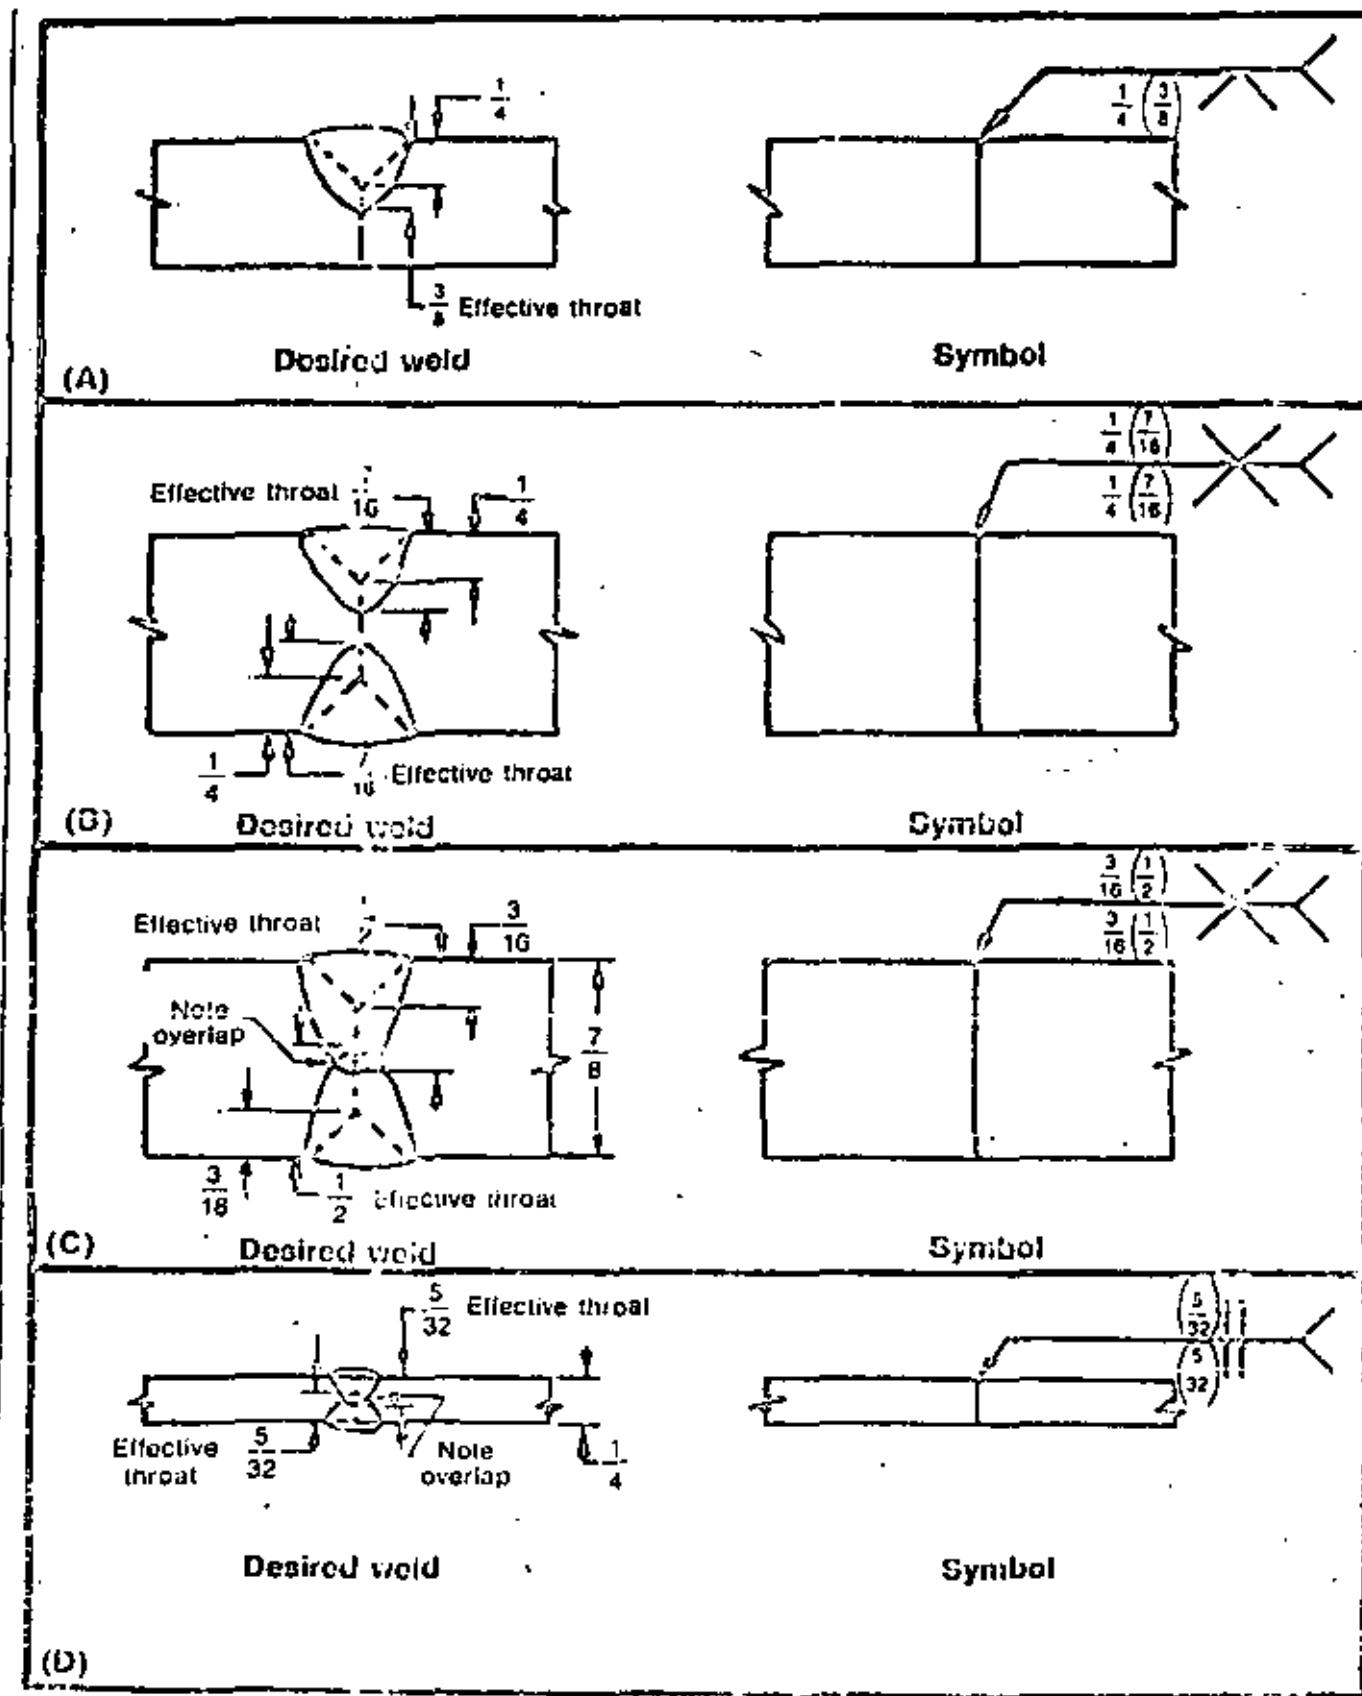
Designation of effective throat of groove welds with specified joint preparation.
